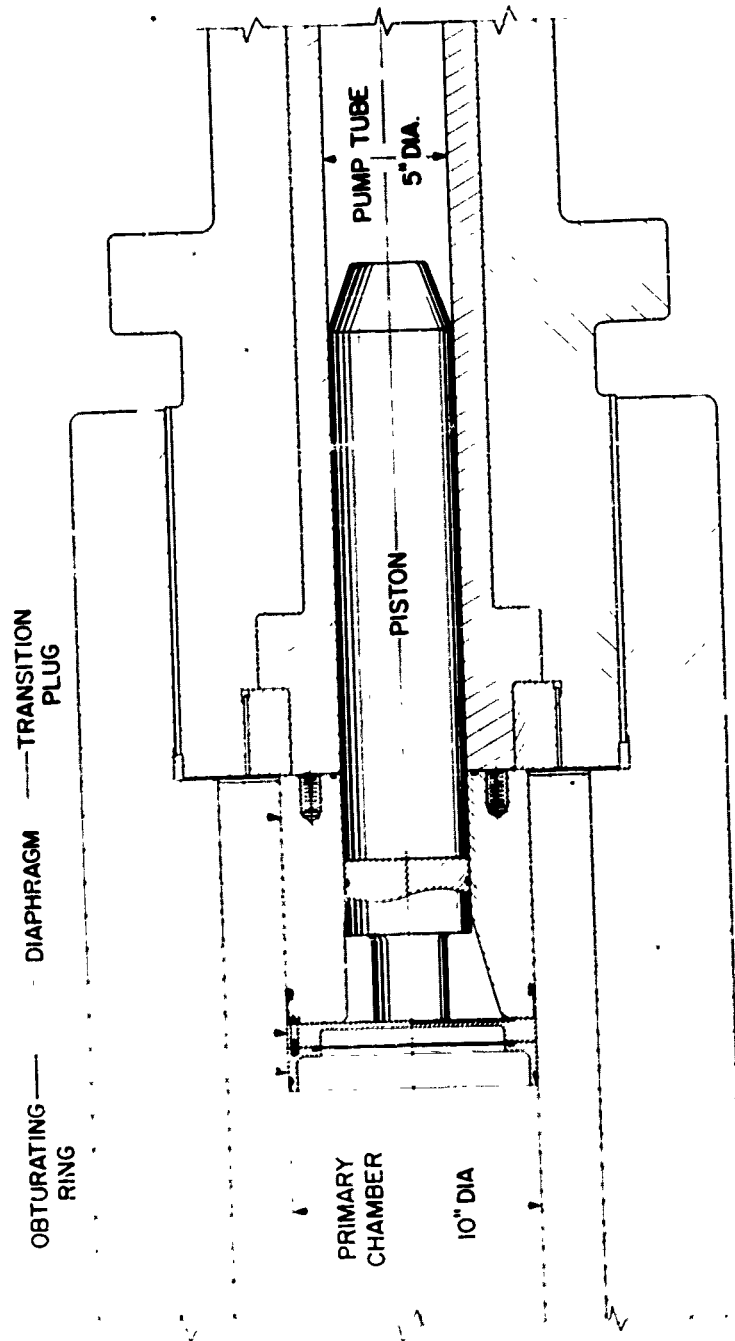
PRIMARY CHAMBER - PUMP TUBE ASSEMBLY
